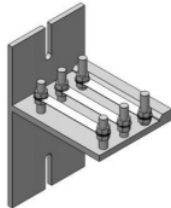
Cutting blade holder with bolt and nut fastening system.
